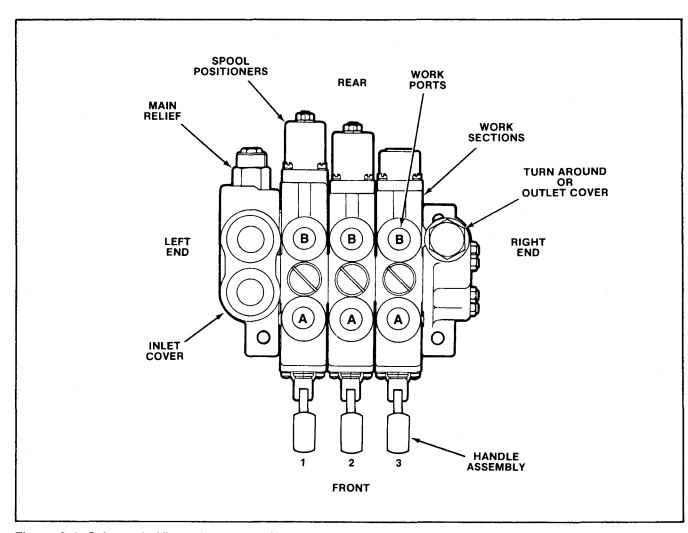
Schematic View of a Typical Model V42 Control Valve Assembly.
